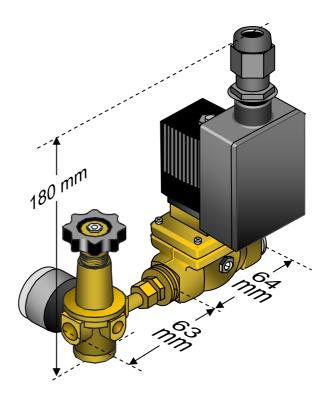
Dimensions of the "air inlet group" consisting of pressure regulator, pressure gauge and digital valve
